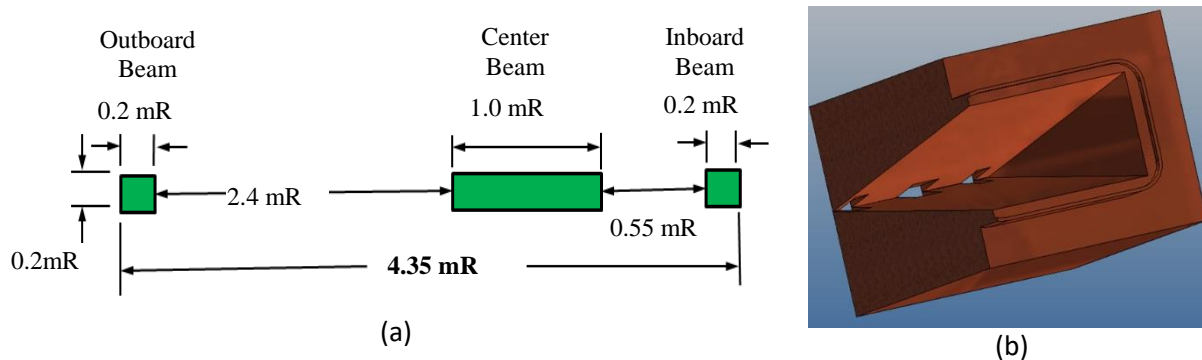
Splitting of the wiggler beam by the fixed mask, (a) dimensions and spacings of the three beams, (b) ID beam is intercepted only by the top and bottom surfaces in the new mask design
